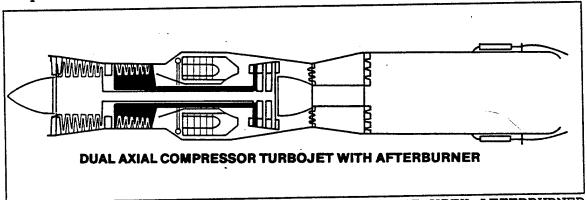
DUAL AXIAL COMPRESSOR TURBOJET WITH AFTERBURNER
